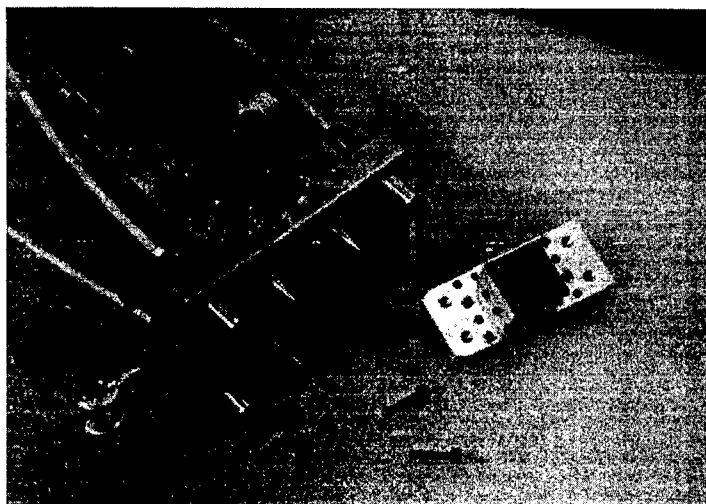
Photo of manifold assembly used to test micromachined bearing pads; bearing pad (fixed features) shown center-right.
